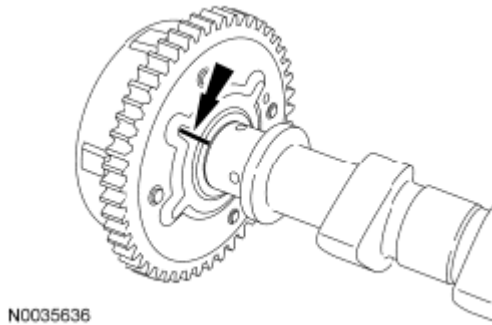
Locating Sprocket & Camshaft Reference Mark
